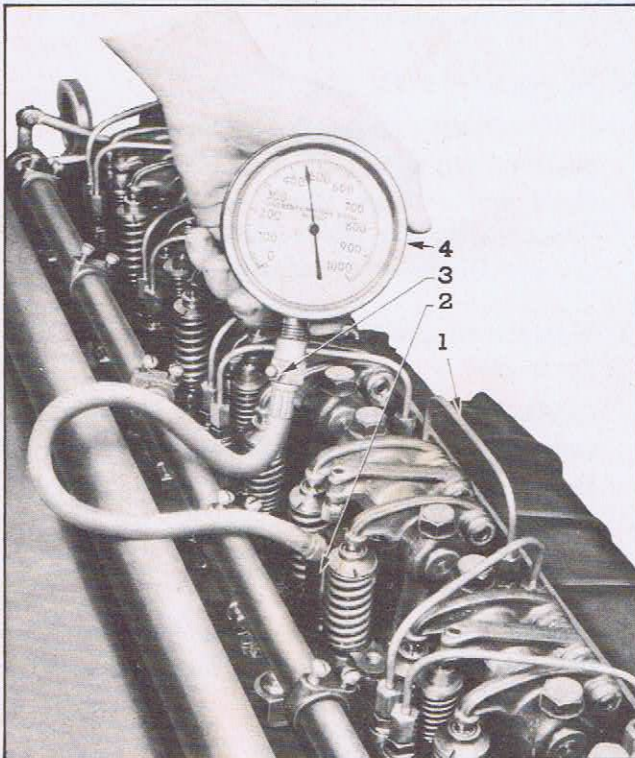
CHECKING COMPRESSION PRESSURE WITH TOOL J-1319-A.
